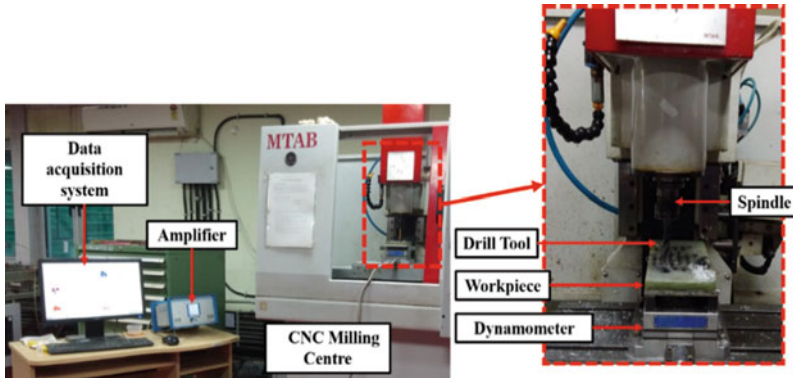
Experimental setup with the workpiece placed on the dynamometer setting
